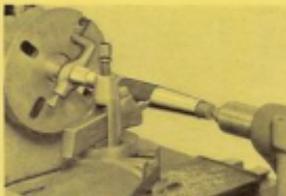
Turning a Taper on an Axle Shaft with Tailstock Set Over.
